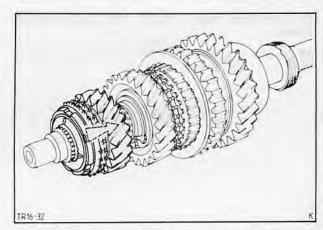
Slide 3rd gear and synchroniser ring onto mainshaft
